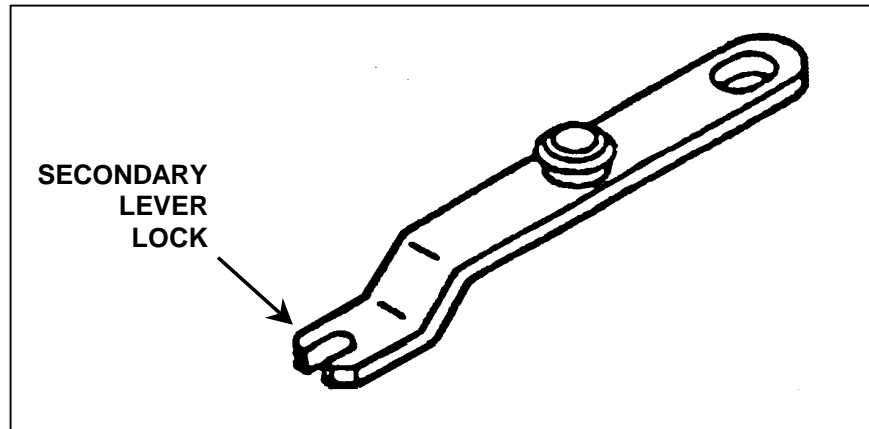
Removal of the primary drive lever and vertical cam assembly.
